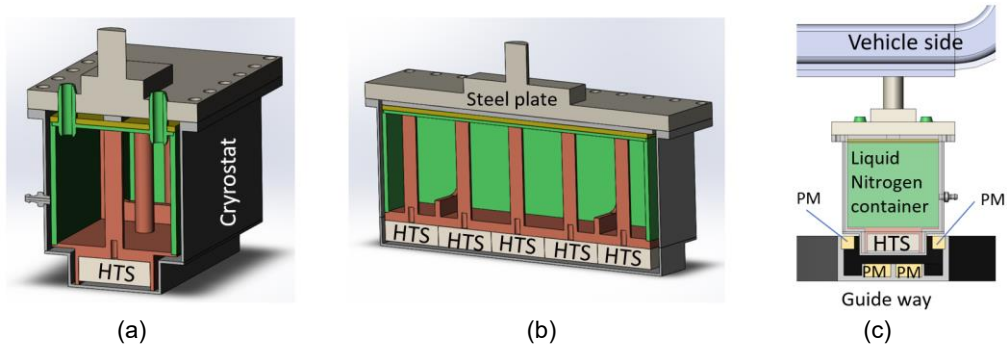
Cryostat cross-section views (a) front view (b) longitudinal view (c) guideway-cryostat-vehicle integration.
